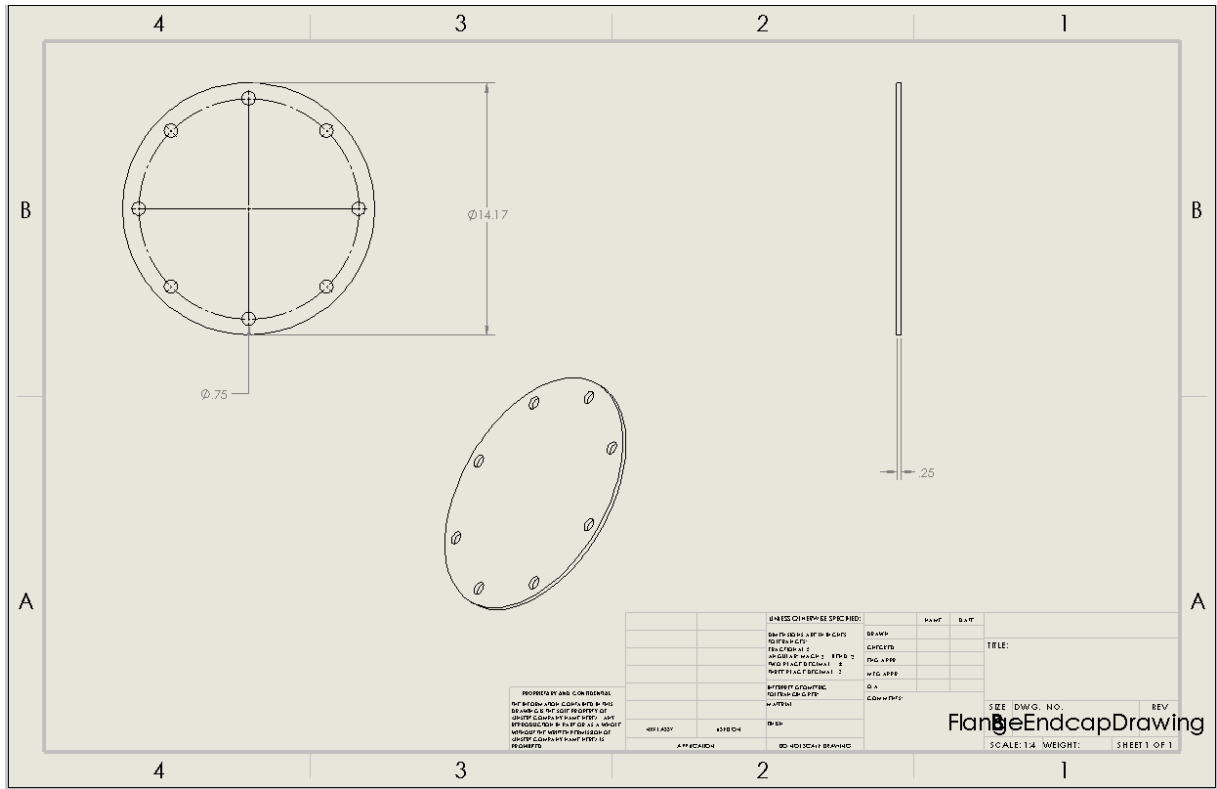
2D CAD Drawing for Flange Endcap in Inches
